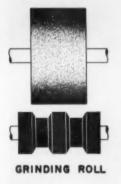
(right) Crush roll (top) transfers the form to the grinding wheel which is used to produce thread roll at bottom.
